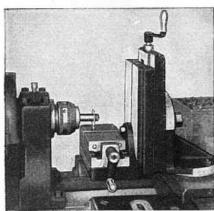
A 9-inch Lathe Equipped with Milling Attachment
